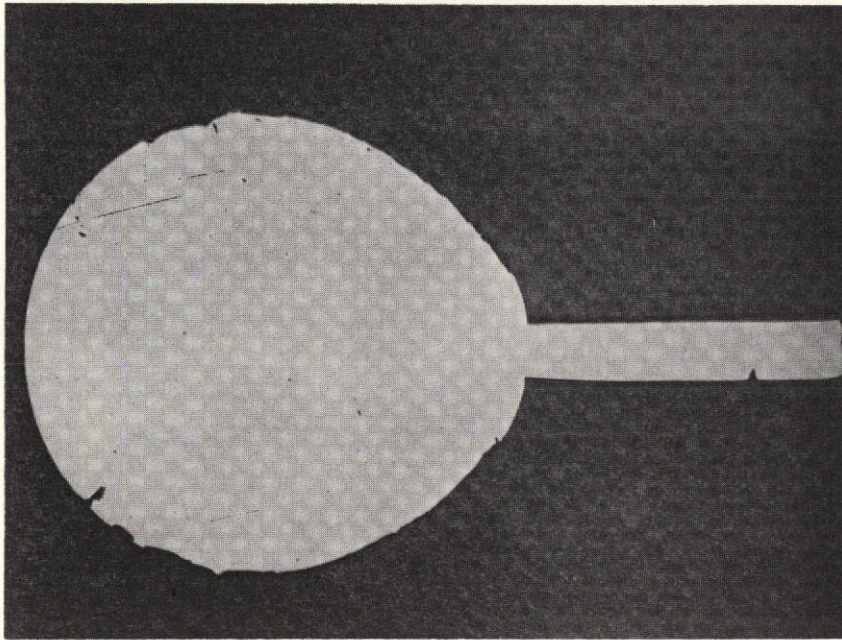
Unetched Cross Section of Specimen SL-2.2
